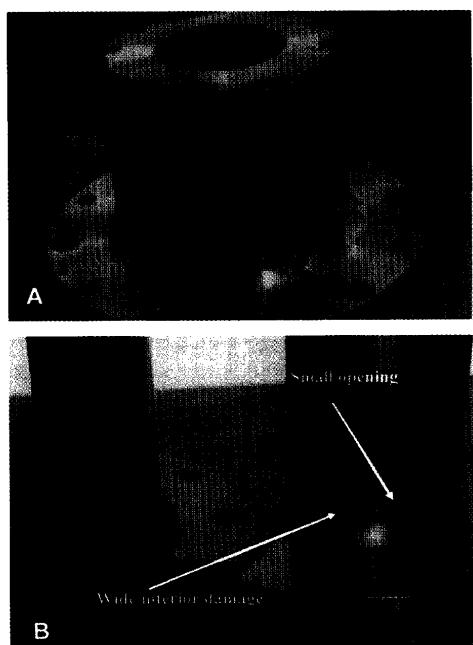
(A) Corroded component showing pitting and crevice corrosion in an MIC failure case. (B) Enlarged view showing pits (unpublished data from JWRI, Osaka University).
